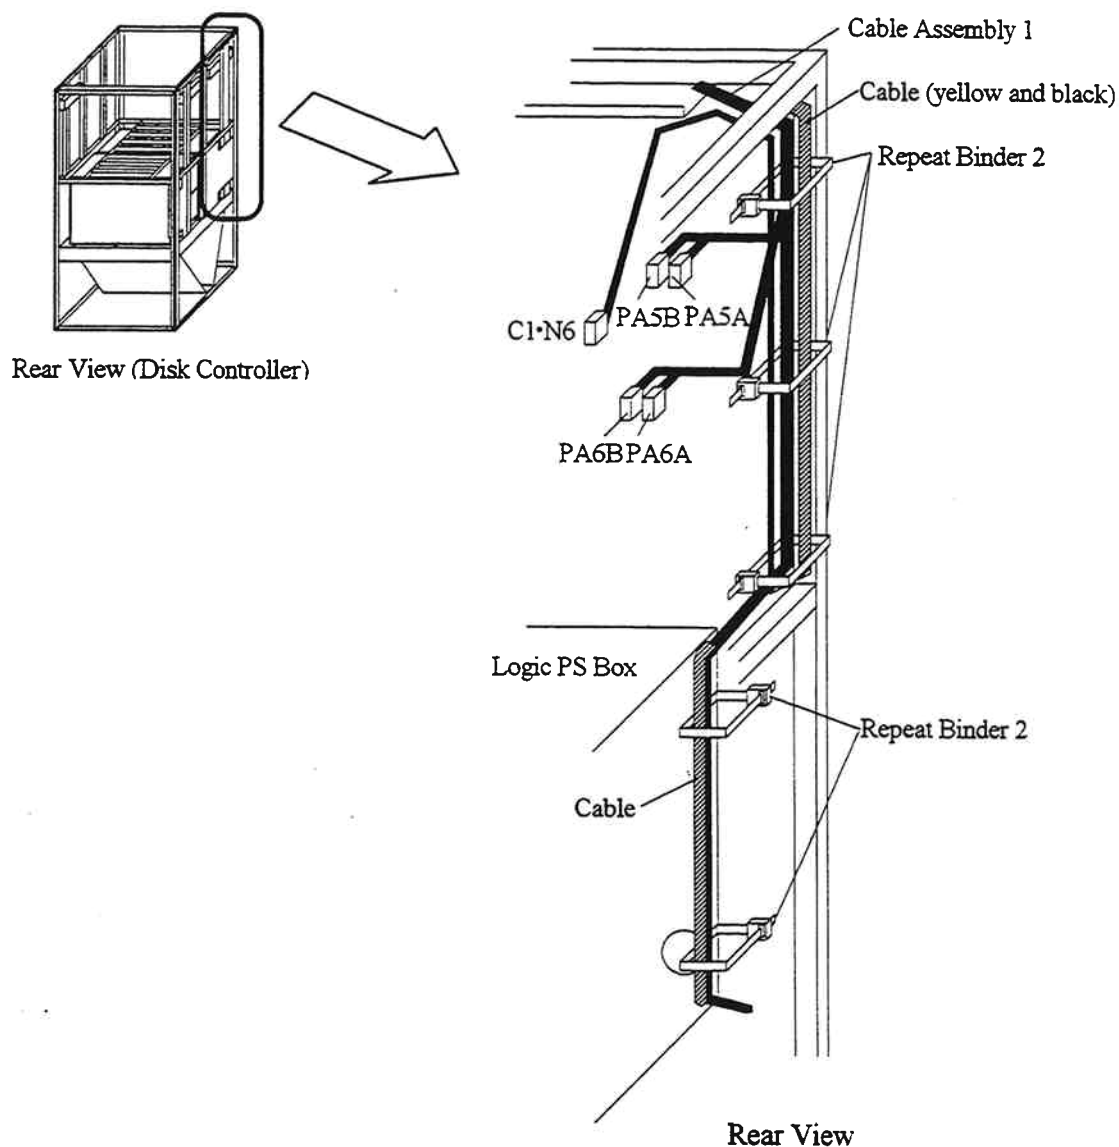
Attachment of the Cable Assembly 1
